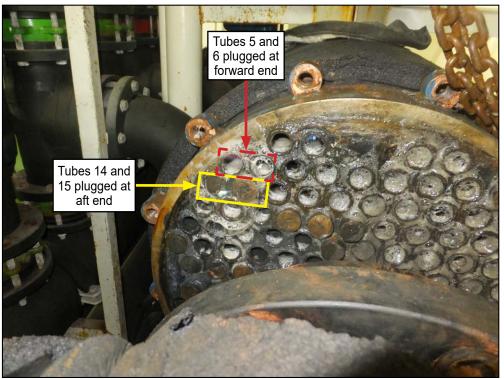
Sunbeam*'s starboard upper heat exchanger, aft end showing tubes 14 and 15 sealed with brass plugs (immediately below tubes 5 and 6)
